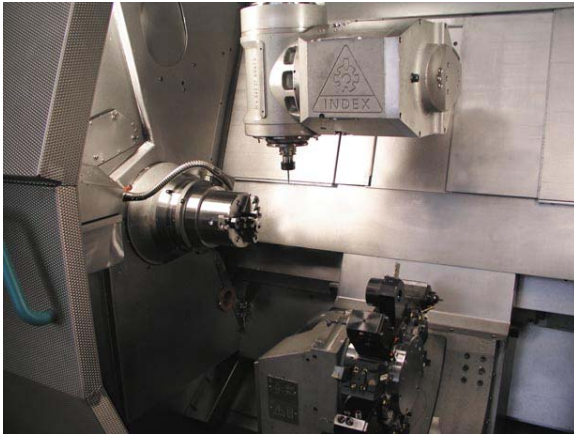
work space of the turn-mill center G160 with motor milling spindle
